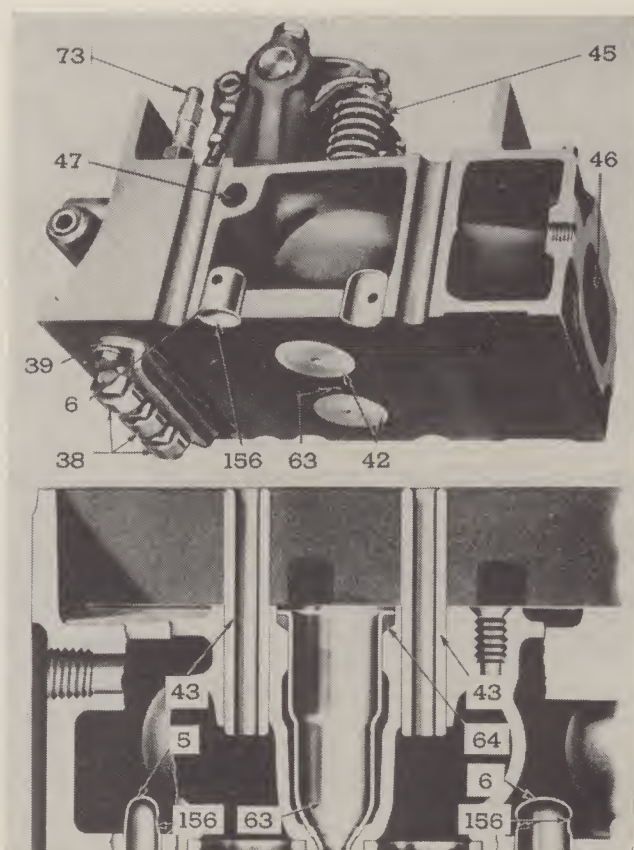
B—GM engine. Showing location of water nozzles (5 and 6) in cylinder head.
